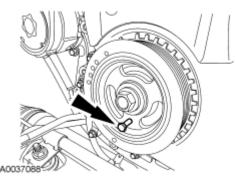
Locating CKP Sensor Alignment Tool And Bolts Courtesy of FORD MOTOR CO.
